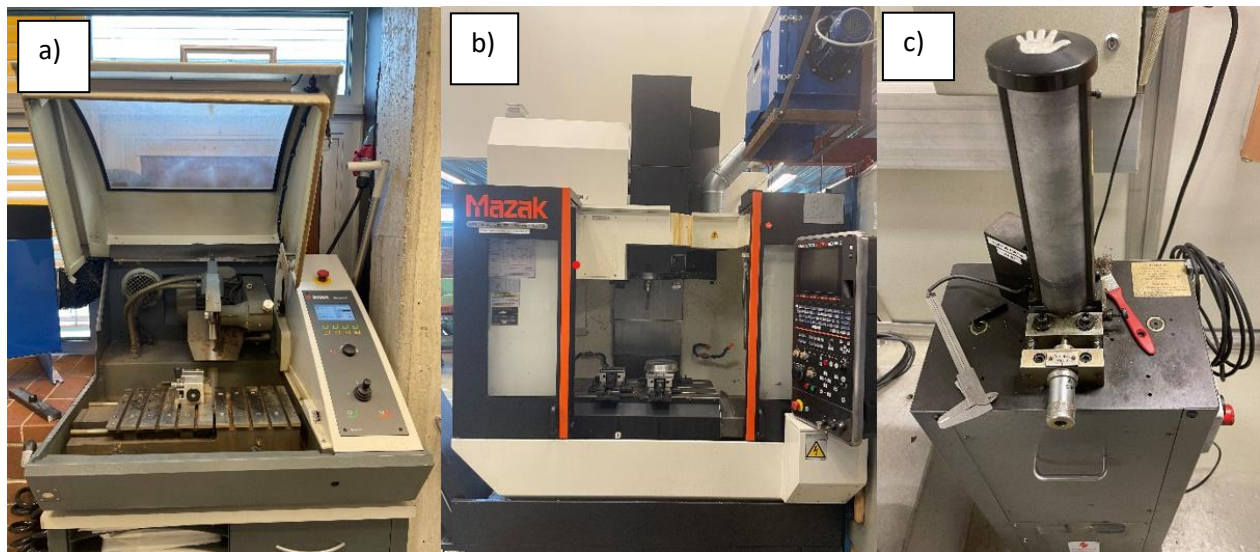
The three machines used for sectioning and preparation for the Charpy V test specimens. a) Struers Discotom 10, b) Mazak Vertical Smart 430A CNC milling machine and c) V-notch broaching machine.
